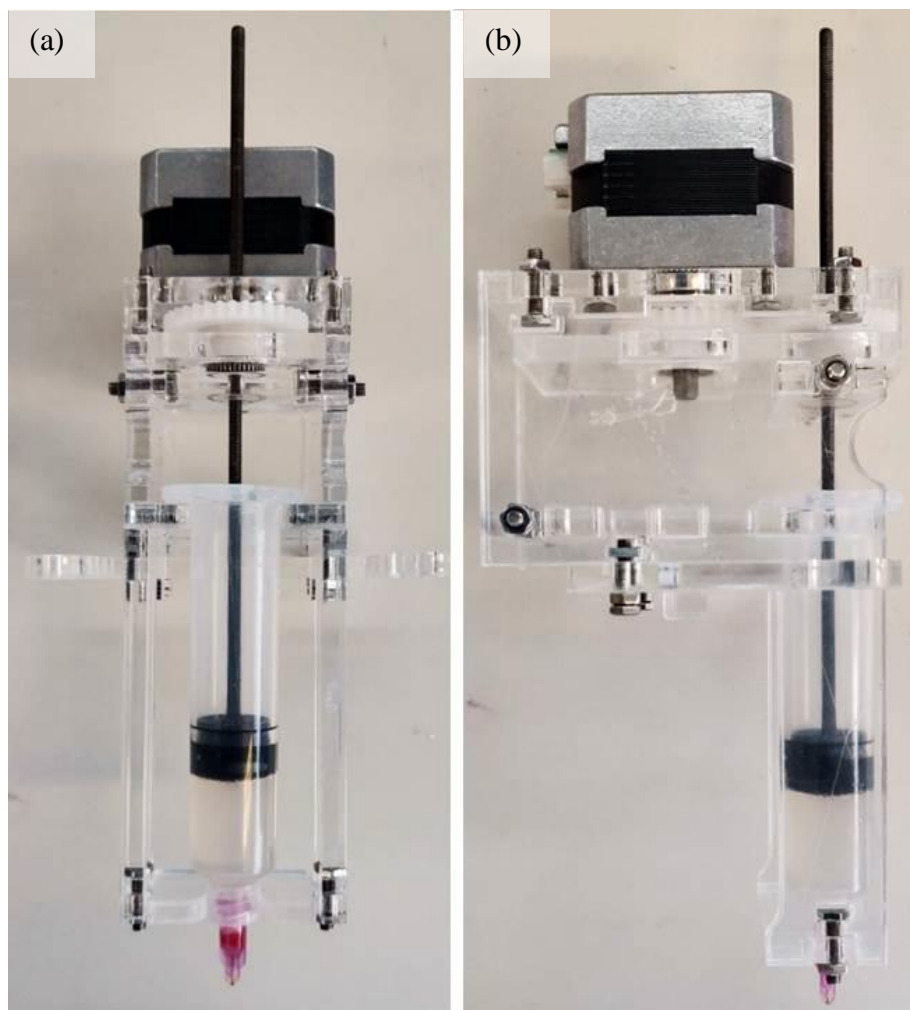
Laser cut components for the extruder housing assembly, (a) the components for housing the extrusion system, (b) the components for affixing the extruder housing to the printer's X-axis carriage
